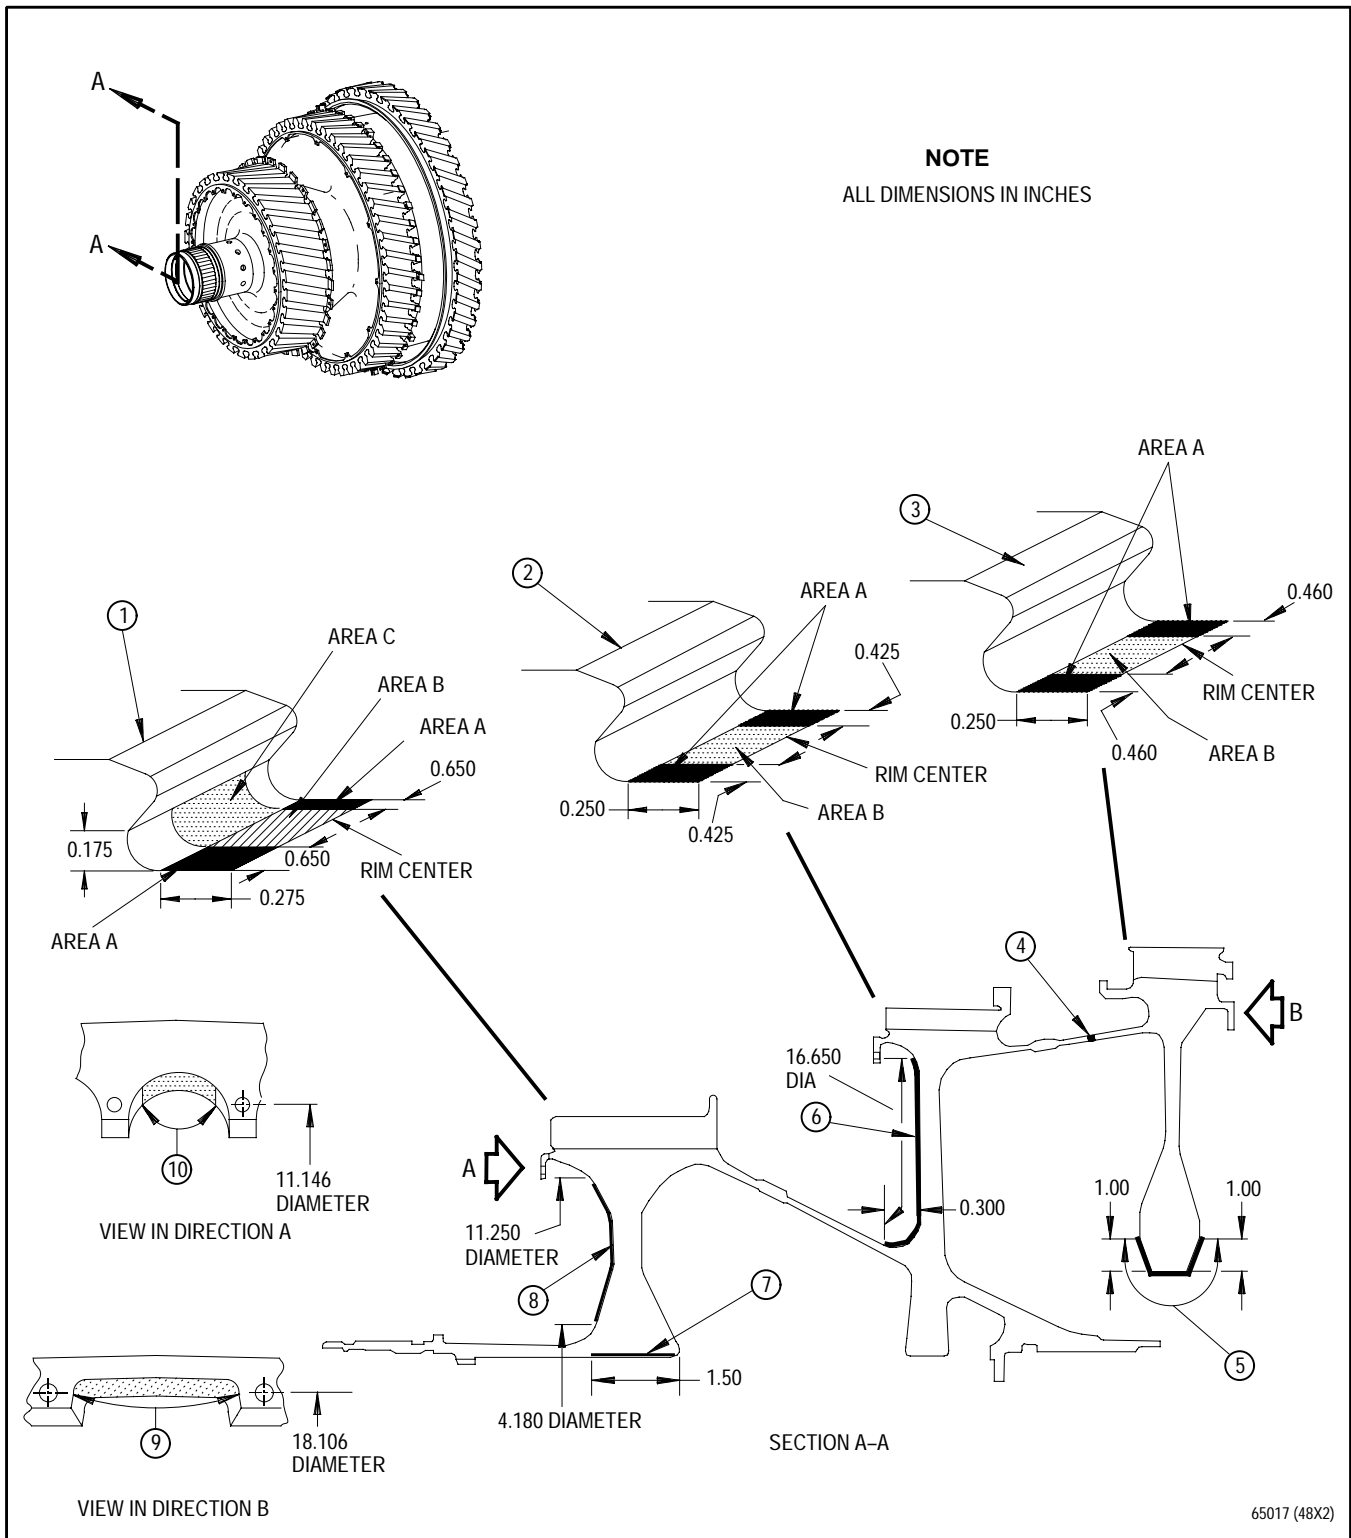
Front Compressor Drum Rotor Disk Assembly - Eddy Current Inspection
